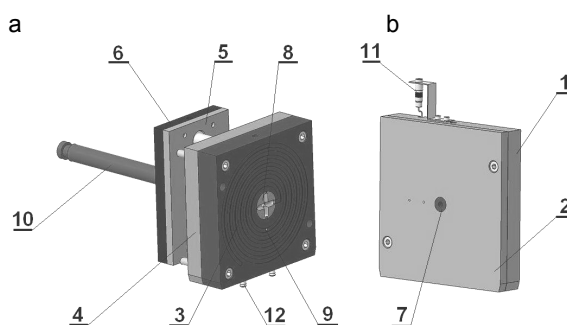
Cavity parts of the injection mold for thermoplastics a) left side, b) right side; 1 – clamping plate, 2 – testing plate, 3 – cavity plate, 4 – plate, 5 – anchor plate, 6 – ejector plate, 7 – sprue puller insert, 8 – special sprue puller, 9 – ejector, 10 – ejector rod, 11 – pressure sensor, 12 – cooling end
